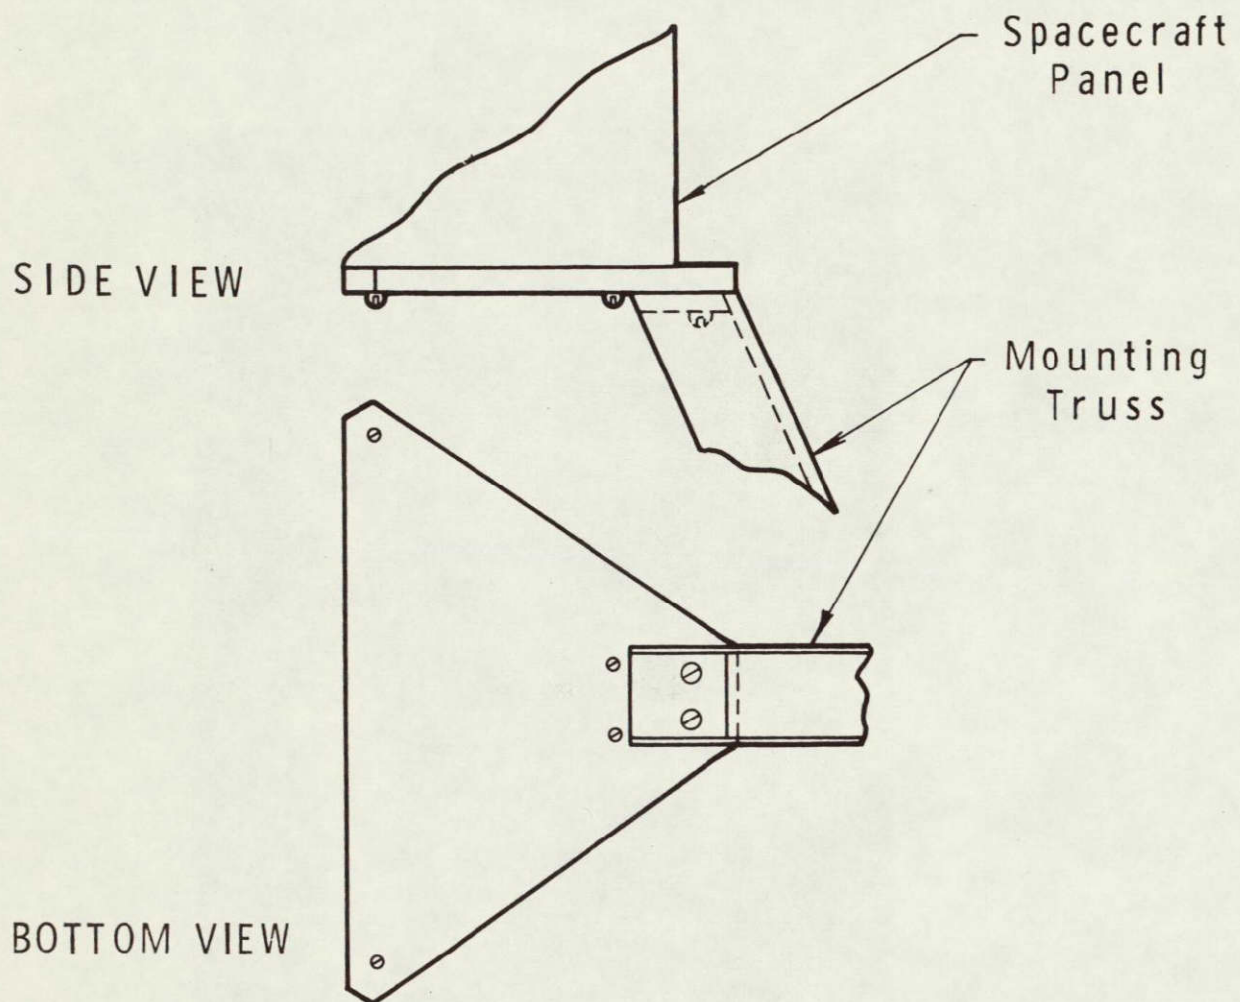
MODEL MOUNTING TRUSS TO SPACECRAFT CONNECTION
